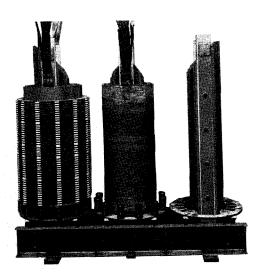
Type ASL Core and Coil Assembly Using Continuous-Wound Coils.
